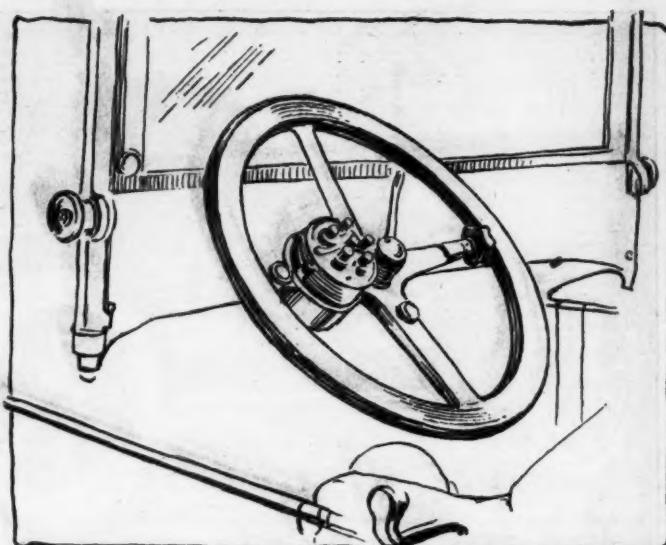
Arrangement of buttons for Vulcan gearshift on S. G. V. demonstrator
